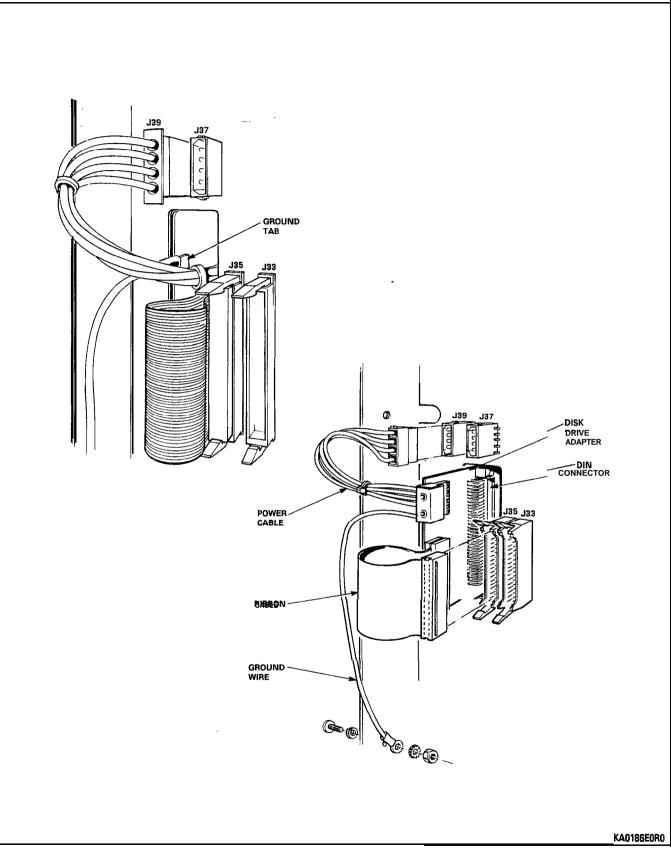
Floppy Disk Drive Connections (SX-200 Welded Cabinet)
